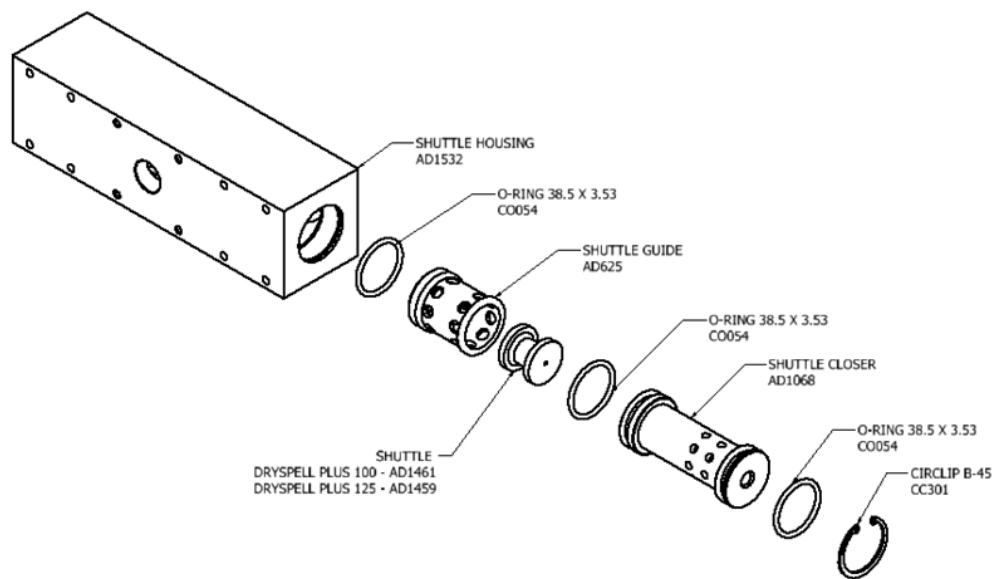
Exploded view of top shuttle-Dryspell Plus 100 & 125
